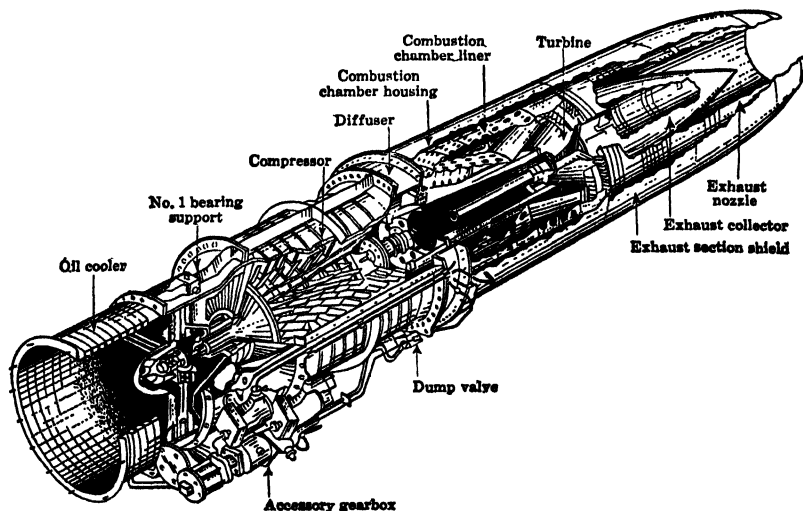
Cutaway view of turbojet with axial-flow compressor. (Courtesy of Westinghouse Electric Corp.)
